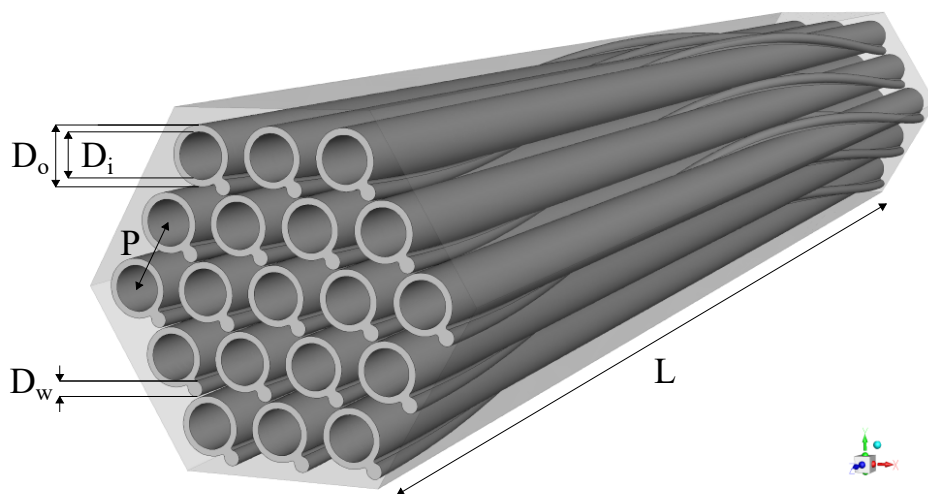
A 19-pin wire-wrapped tube bundle geometry. The inner tube diameter D_i , outer diameter D_o , wire diameter D_w , pin-to-pin pitch P and bundle length L are indicated, the latter being equal to one helical pitch in this example.
